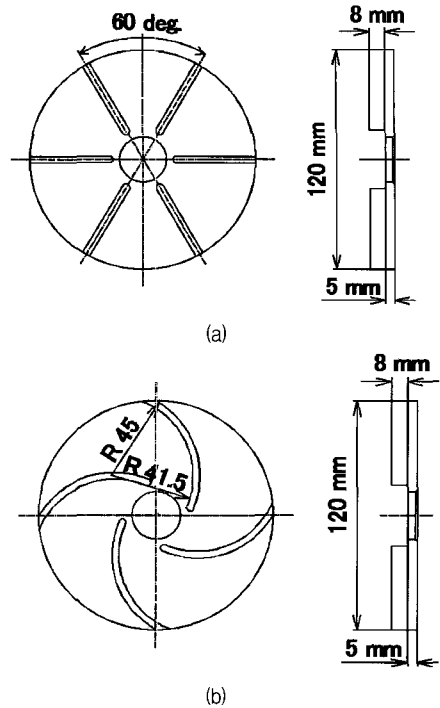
Configuration of test impellers : (a) impeller A ($\beta_2=90^\circ$) and (b) impeller B ($\beta_2=30^\circ$)
